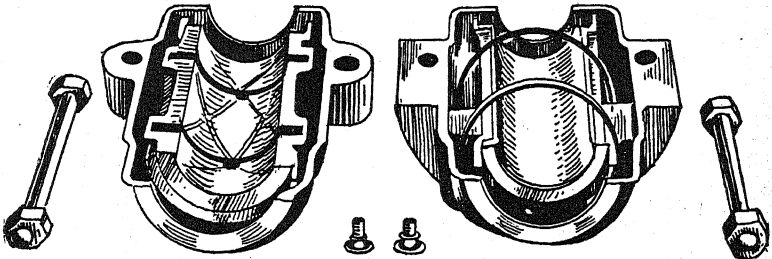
,238 to 1,243.—Self-oiling, self-aligning, bearing open. View showing oil grooves, rings, bolts, etc.
